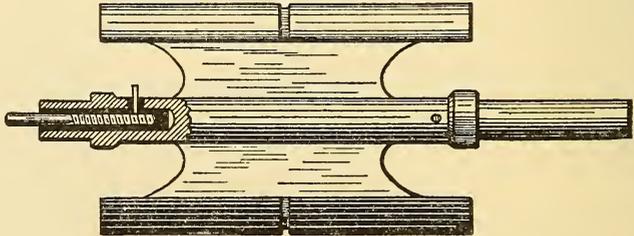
ARMATURE CORE OF TYPICAL GENERATOR.
